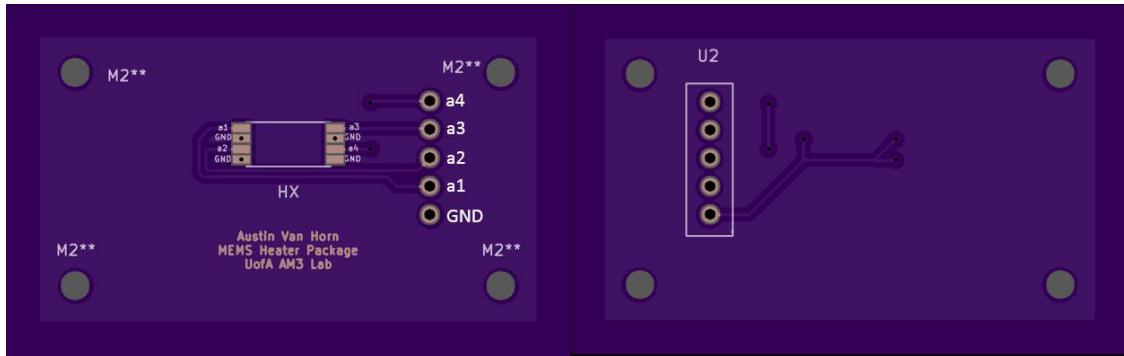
PCB Microheater Packaging with Front (Left) and Backside (right) Views
